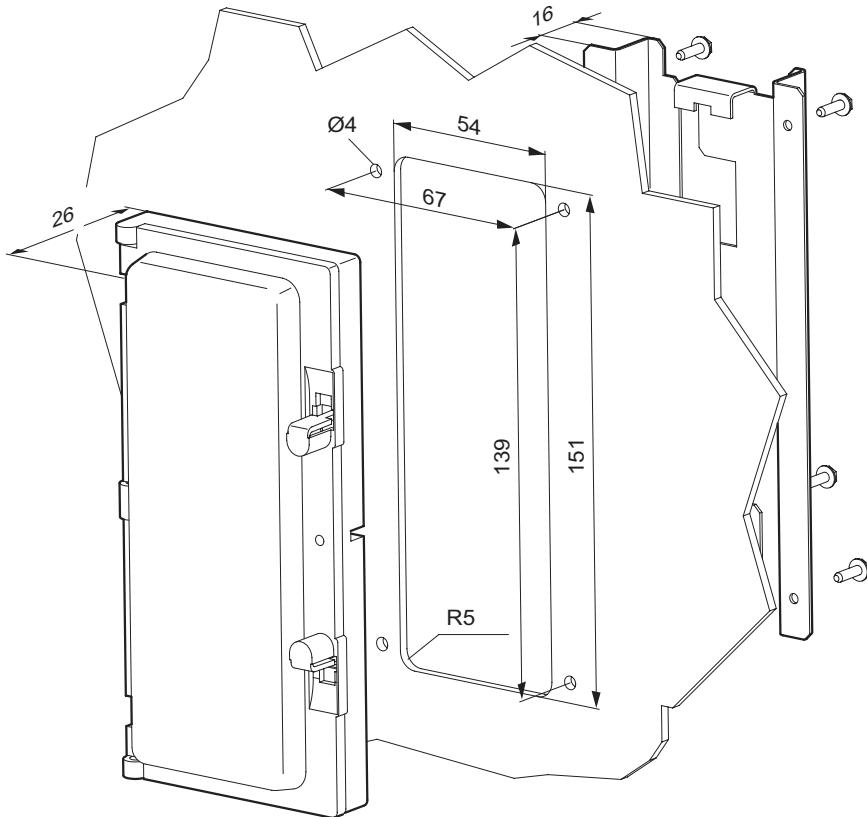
Dimension drawing for DBG60B housing, dimensions in mm
